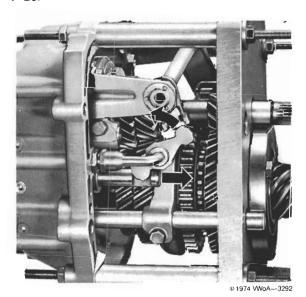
Reverse lever and support being moved (arrows) to reconnect lever. Slightly tighten union
